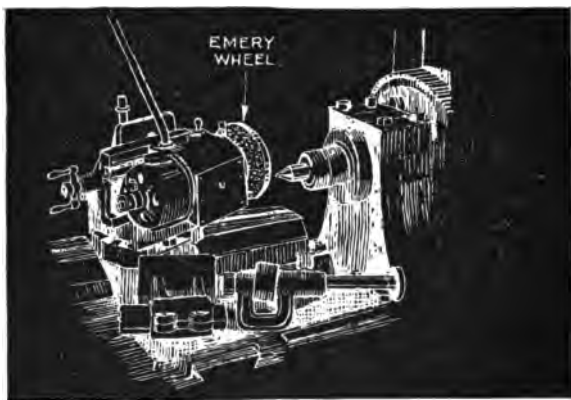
,942.—U. S. combination grinder with internal grinding attachment taken off and every wheel put on in place of pulley for *external grinding operation*.
